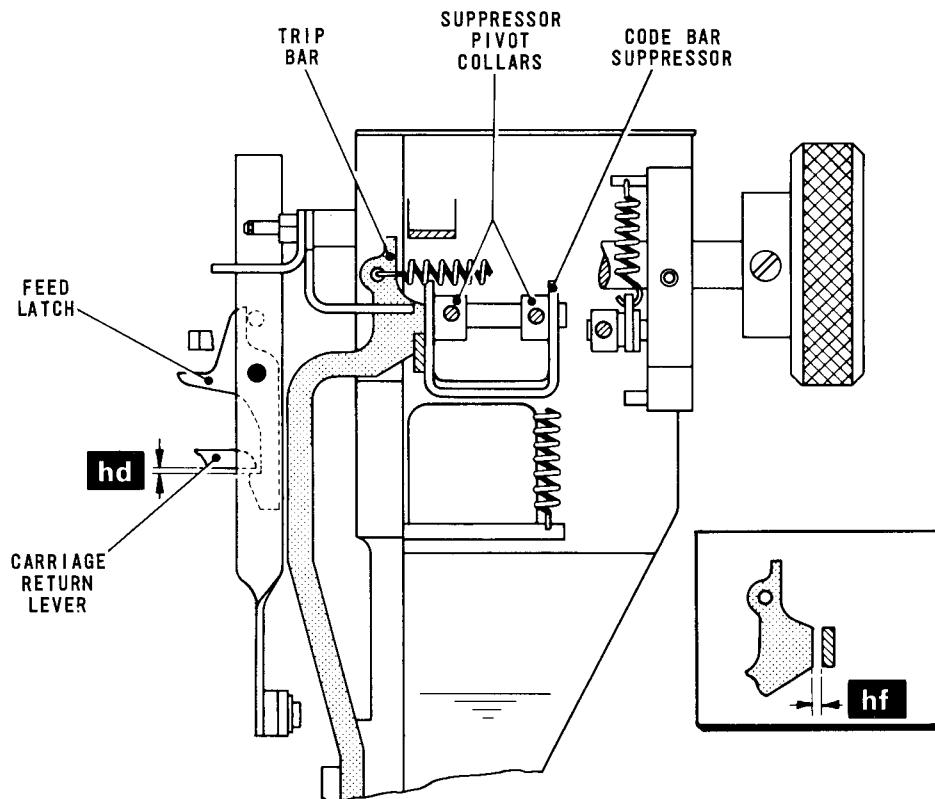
TRIP BAR/CODE BAR SUPPRESSOR MECHANISM
